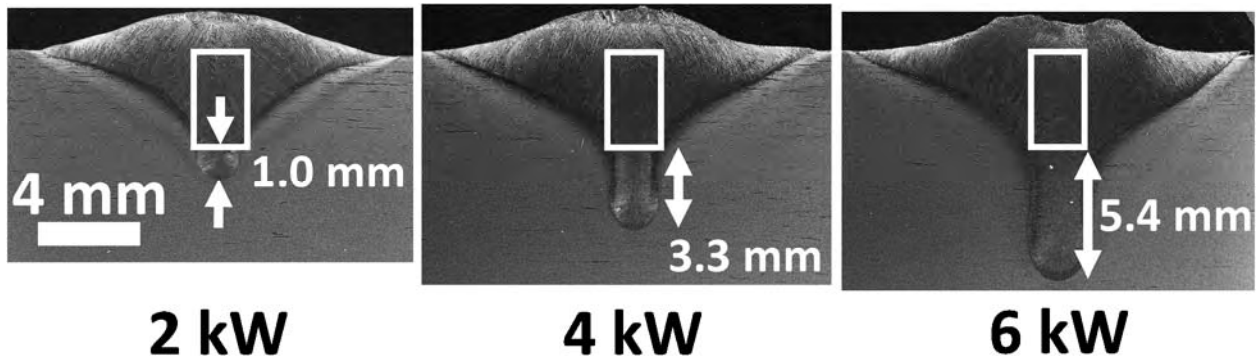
The calculated cylindrical volumetric heat source outline is overlaid on the 10 mm/s hybrid welds. The gap between the bottom of the heat source and weld bottom becomes increasing larger with laser power. The larger gap combined with a larger of weld volume behind the gap led to more pores escaping in the 4 and 6 kW welds.
